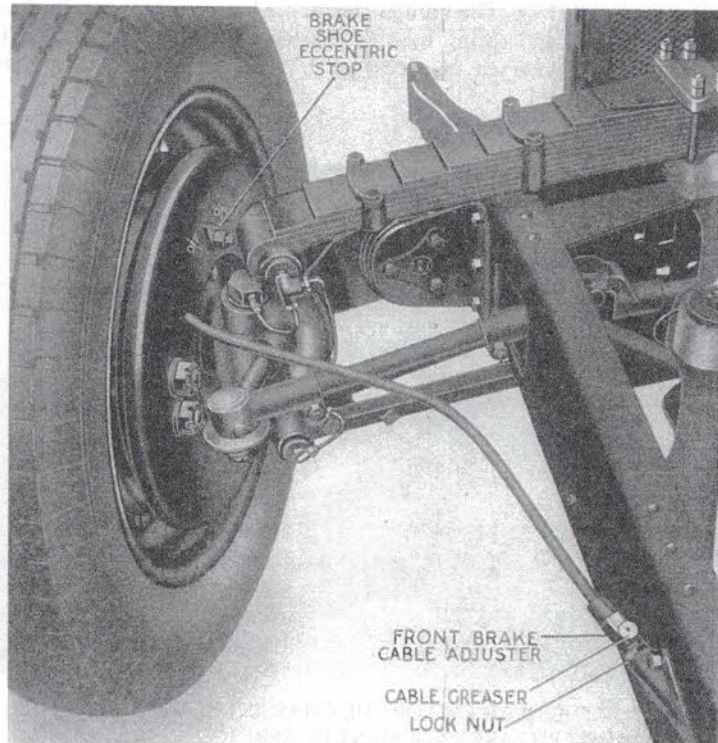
VIEW OF THE NEARSIDE FRONT BRAKE ASSEMBLY. Showing the brake shoe eccentric stop and the front brake cable adjuster.
